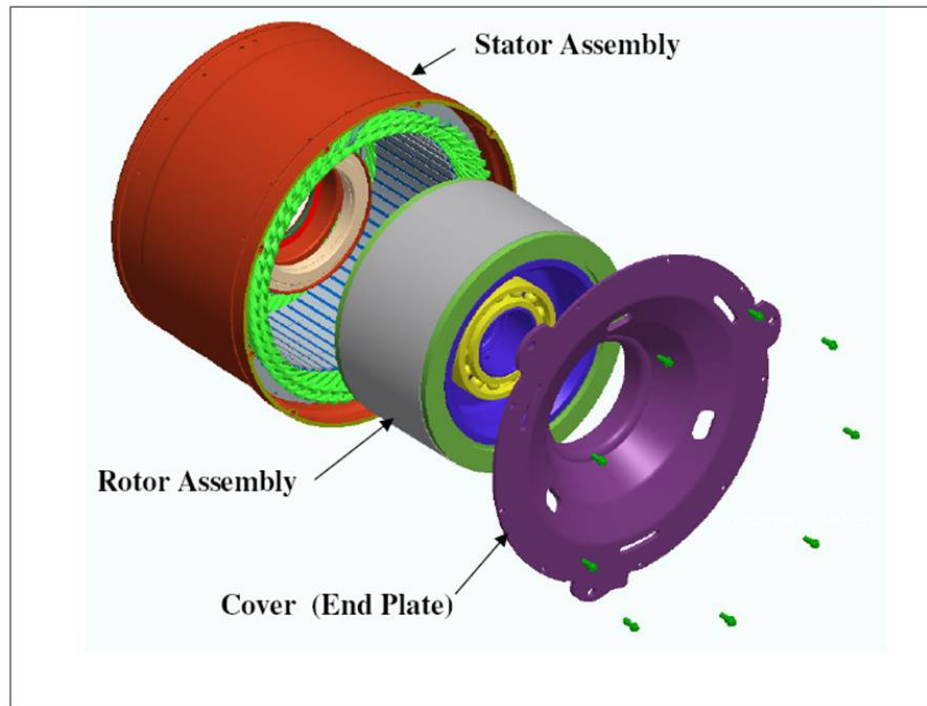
Drive Motor-Generator and 3-Phase Cable Assemblies
